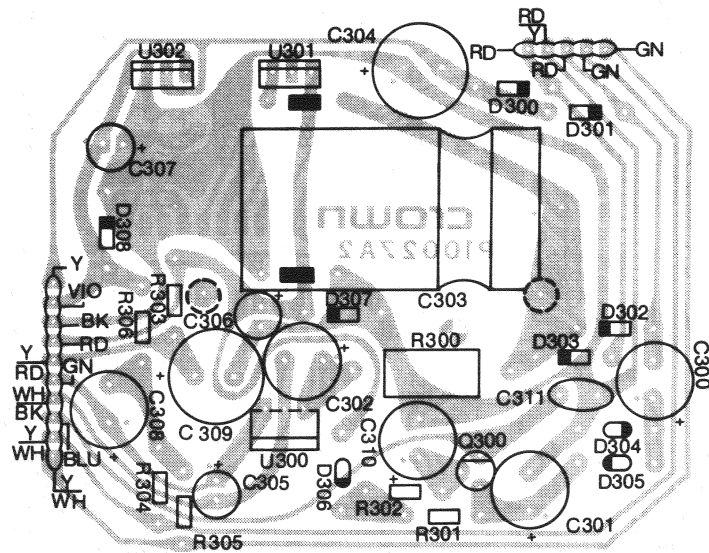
Power Supply Component Board Layout; #Q42500-1
